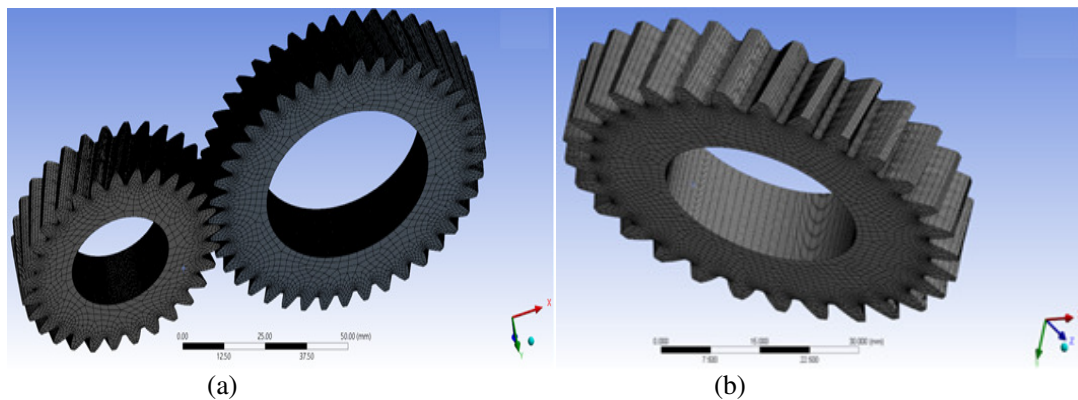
The meshed helical gear (a) in pairs and (b) alone
